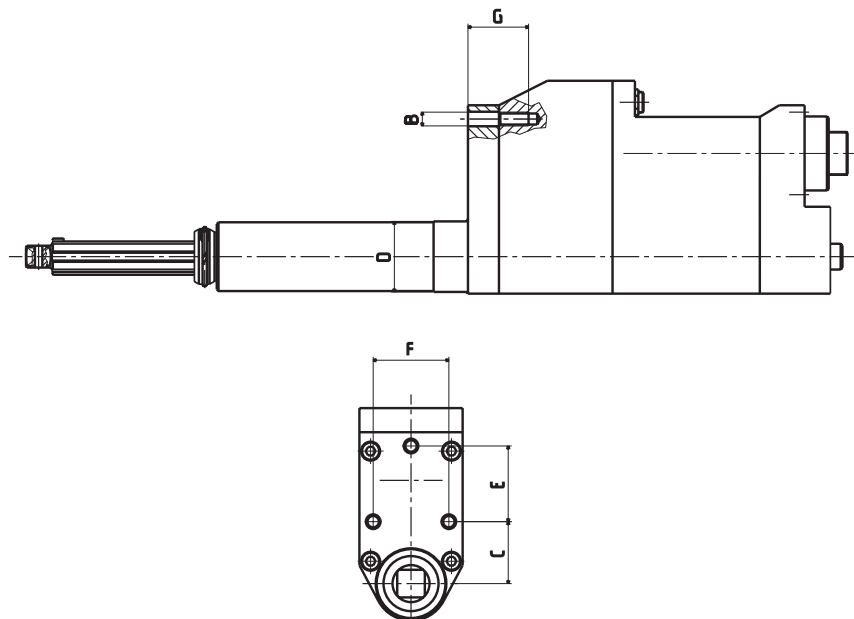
Main dimensions for the installation on a mounting plate (VMC)
